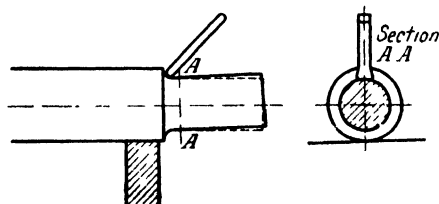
METHOD OF STRAIGHTENING A SHAFT END
